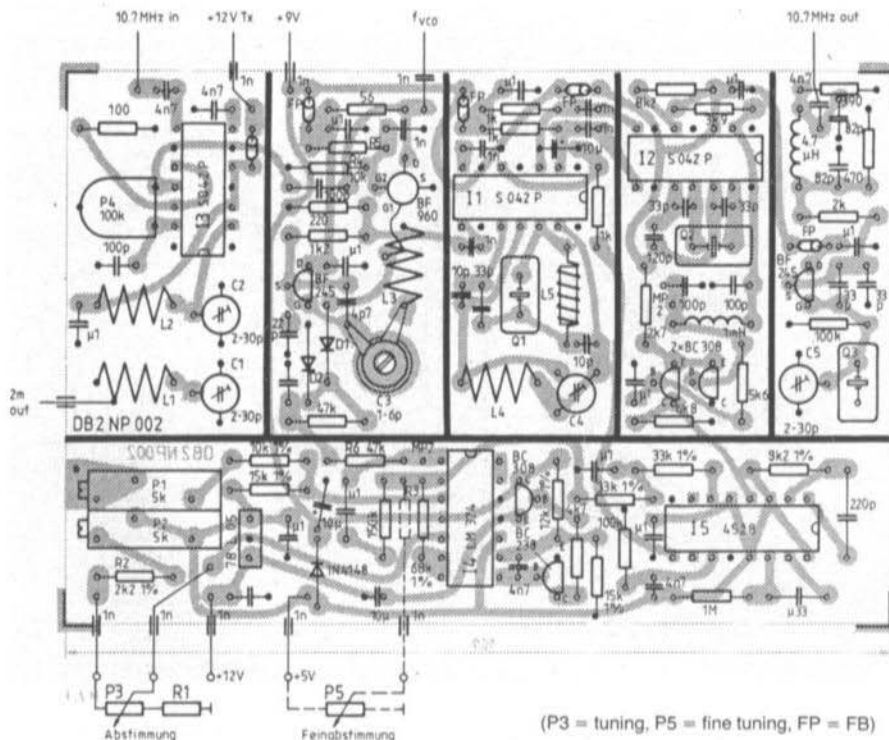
The component layout for PCB DB 2 NP 002 for the circuit of fig. 8
